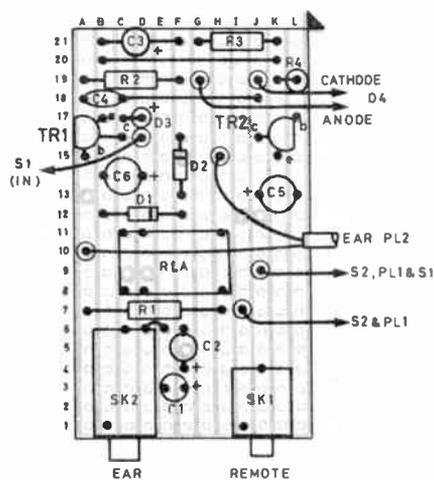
Veroboard layout and wiring for the Freeloader. The board is mounted by SK1 and SK2.
